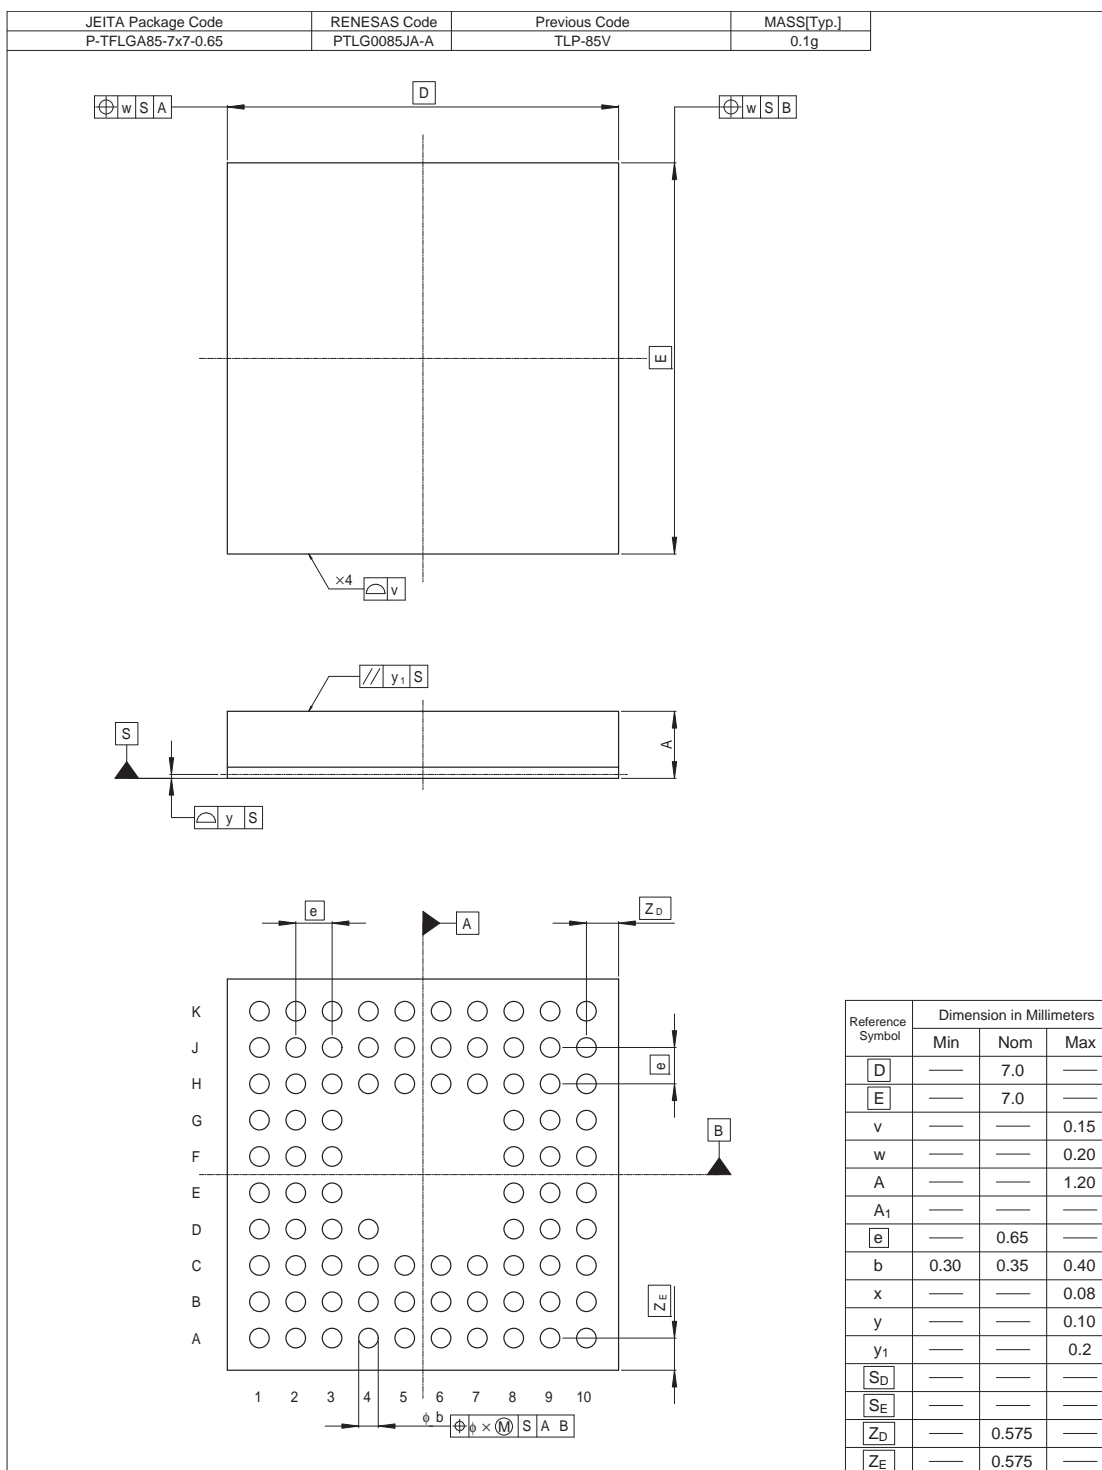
Pin TFLGA (PTLG0085JA-A) Package Dimensions
